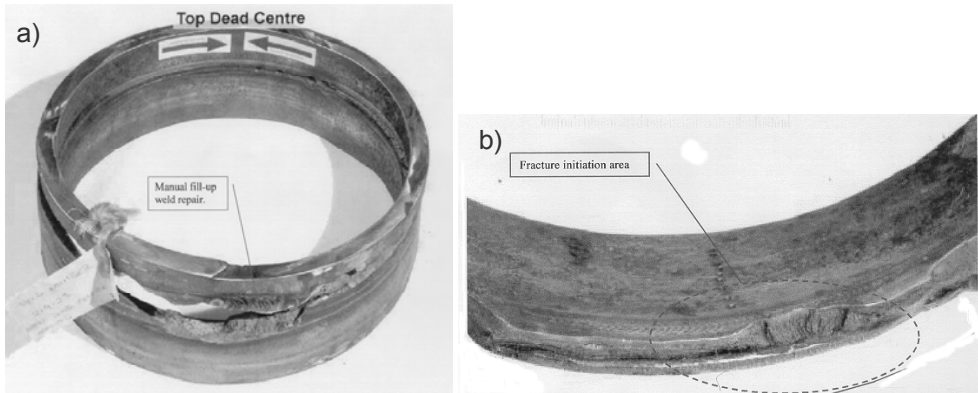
Failure of orbitally welded supermartensitic stainless steel pipeline during pipe laying in Tune oil and gas field, North Sea: a) Overview of pipeline failure, b) Crack initiation adjacent to the 6-hour position.
